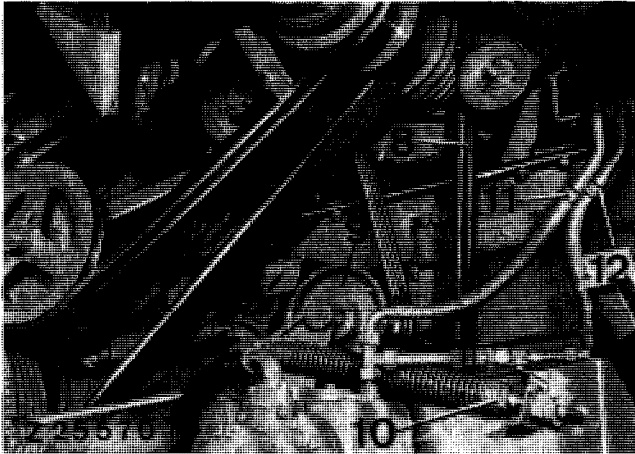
Preparing to Remove Engine (Combine with Hydrostatic Drive)
